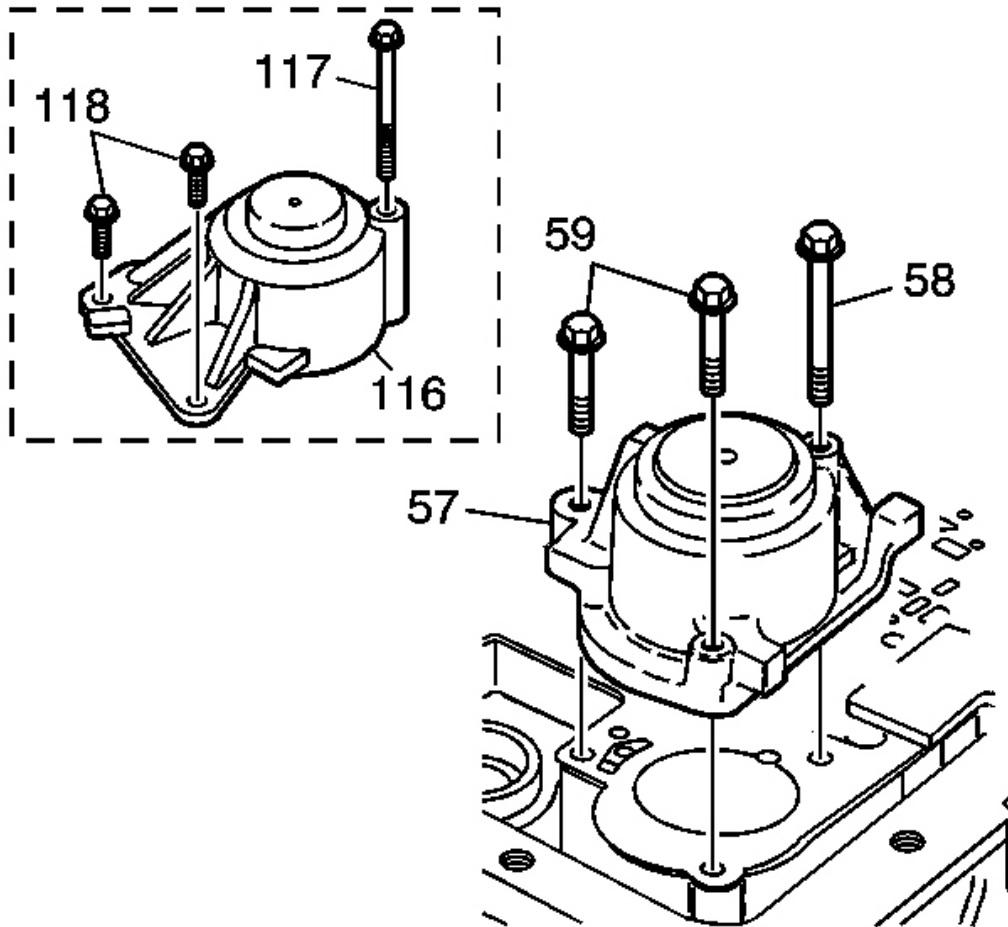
Installing 1-2 Accumulator Housing Bolts
